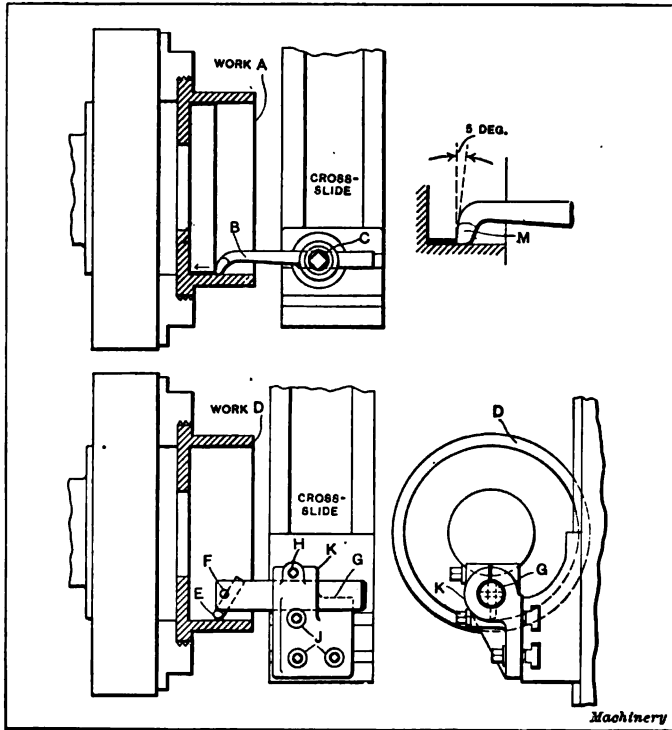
(Upper View) Forged Type of Boring Tool; (Lower View) Boring Tool with Inserted Cutter
